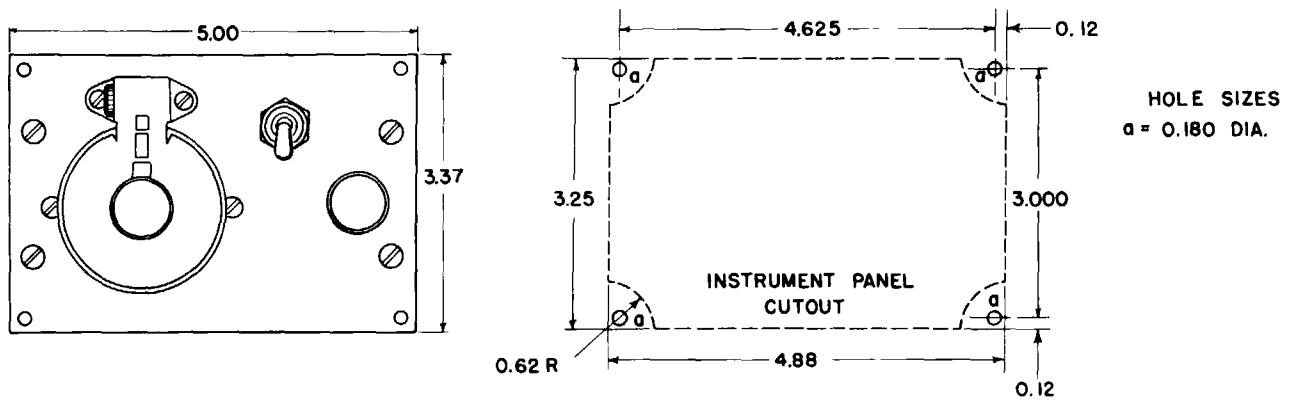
Control Panel C-512/ARN-14, Outline and Mounting Dimensions
